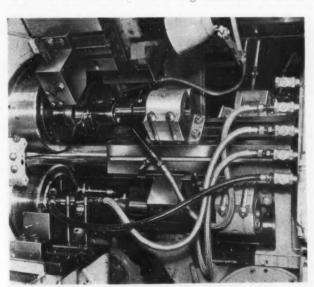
Close-up View of the Working Zone of One of the Large Acme-Gridley Automatics, Set Up for Machining Outer Races from 4§-in. Diameter Tube
